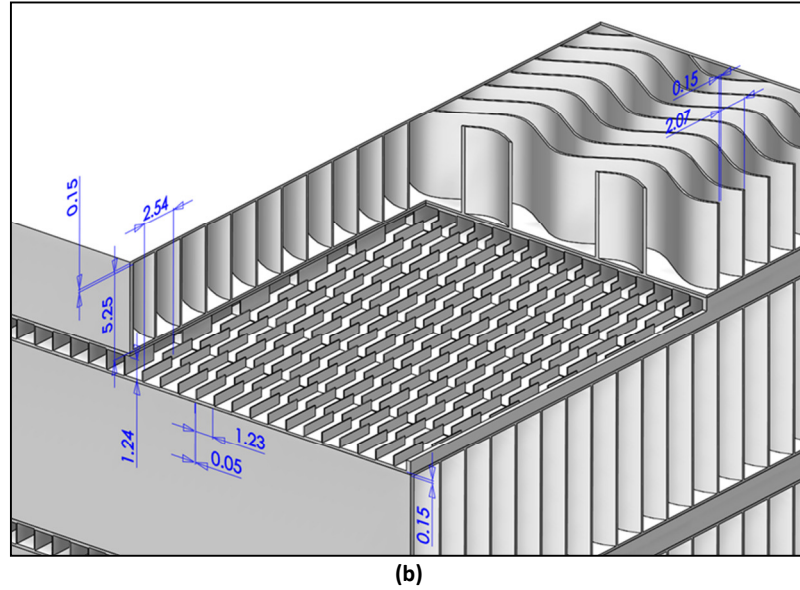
CAD drawings of the baseline heat exchanger (all dimensions are in mm)
